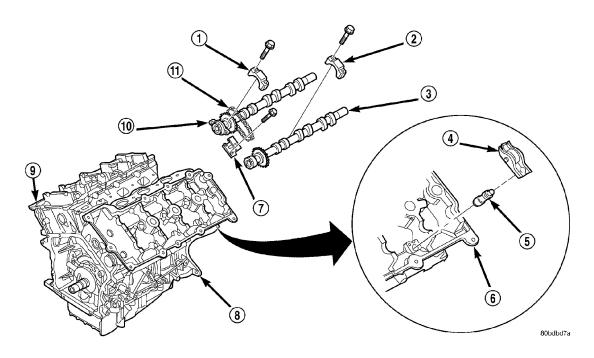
Identifying Camshaft & Valvetrain Components Courtesy of CHRYSLER LLC
